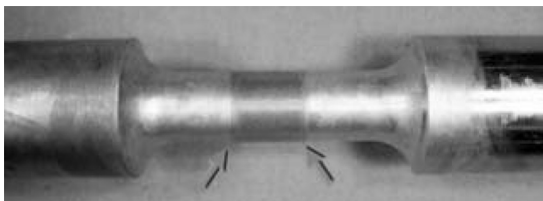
Photograph of typical test bar in rough machined state. (Source: Liburdi Engineering.)
